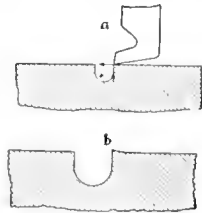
SHARP EDGE PRODUCED AT THE EDGE OF AN OIL GROOVE BY AN ORDINARY LATHE TOOL
